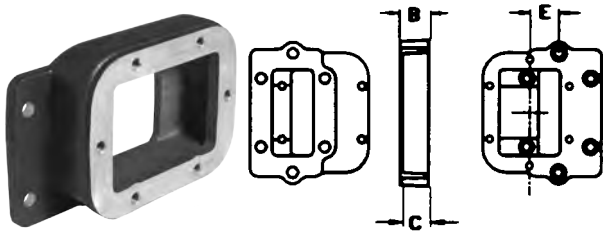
FLANGED BODY SINGLE GEAR
